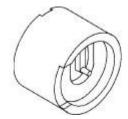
Timing Chain Tensioner Resetting Gauge 8186 Courtesy of CHRYSLER LLC
